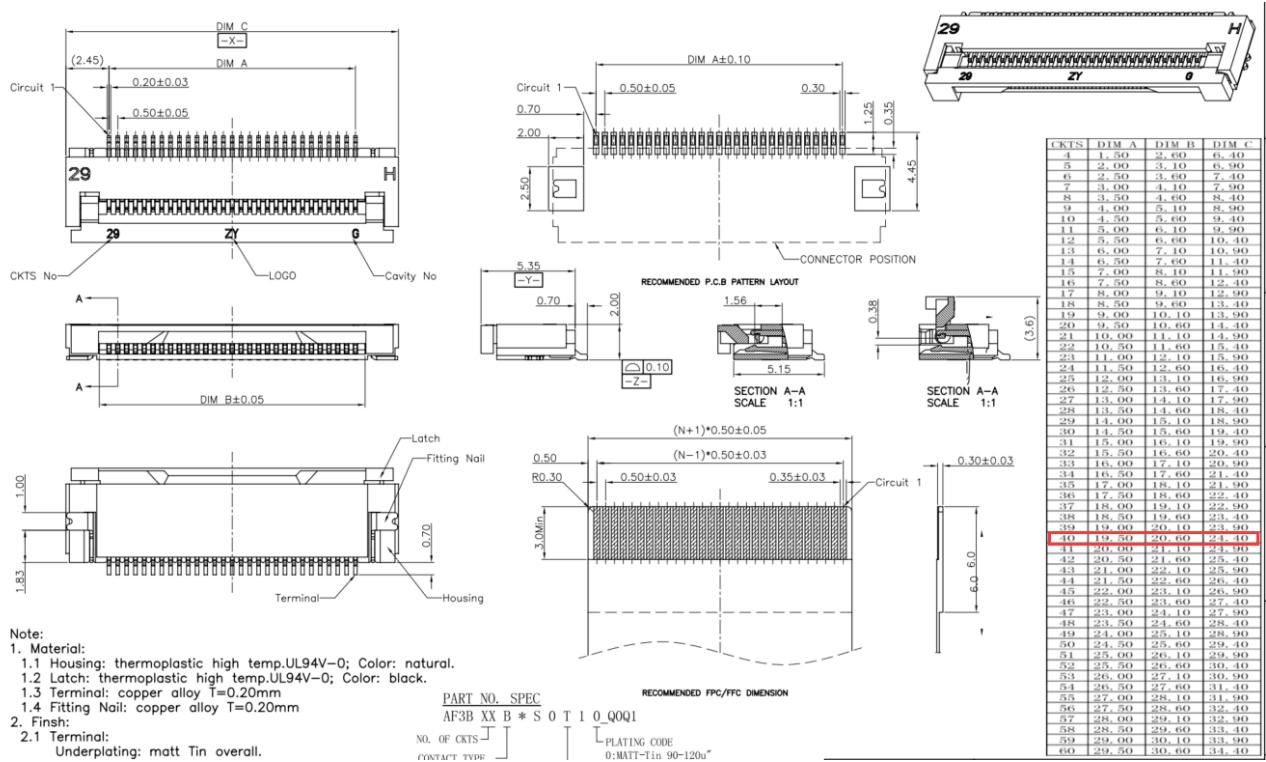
Flip and 0.5mm Pitch and 40 PIN FPC PCB Package
